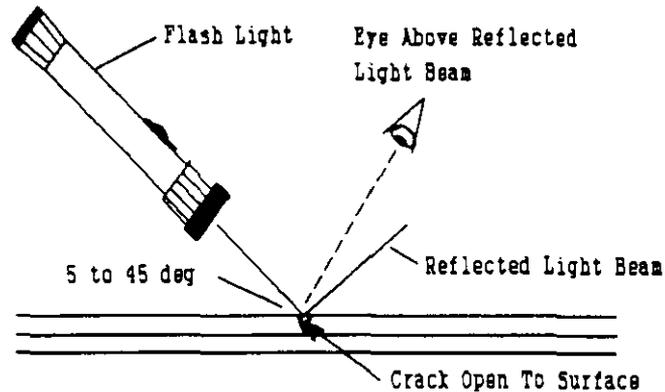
Visual inspection of metal surfaces.
